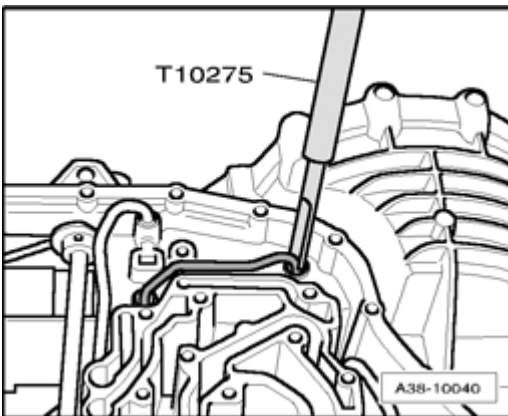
Driving Oil Tube For Rear Final Drive Gradually Into Transmission Housing Using Drive-In Tool For Oil Tube Rear Final Drive T10275
